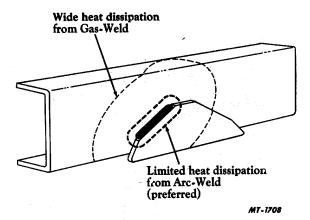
Weld Sample Showing Lower Heat Dissipation Possible with Shielded Arc-Welding.
